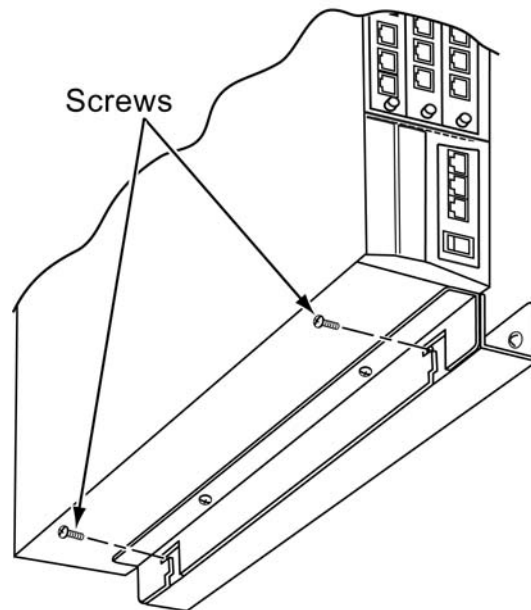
Secure Metal Fitting to Lower Wall Mount Bracket with Screws
